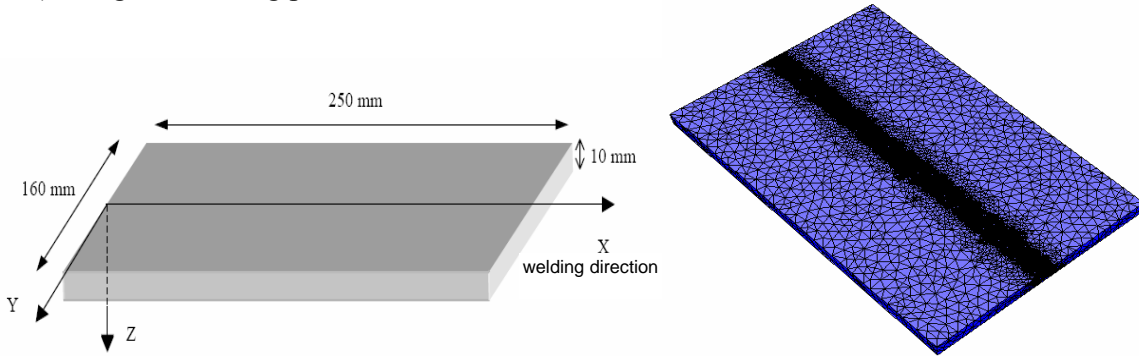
TIG welding on a thick plate: geometry and finite element mesh.
